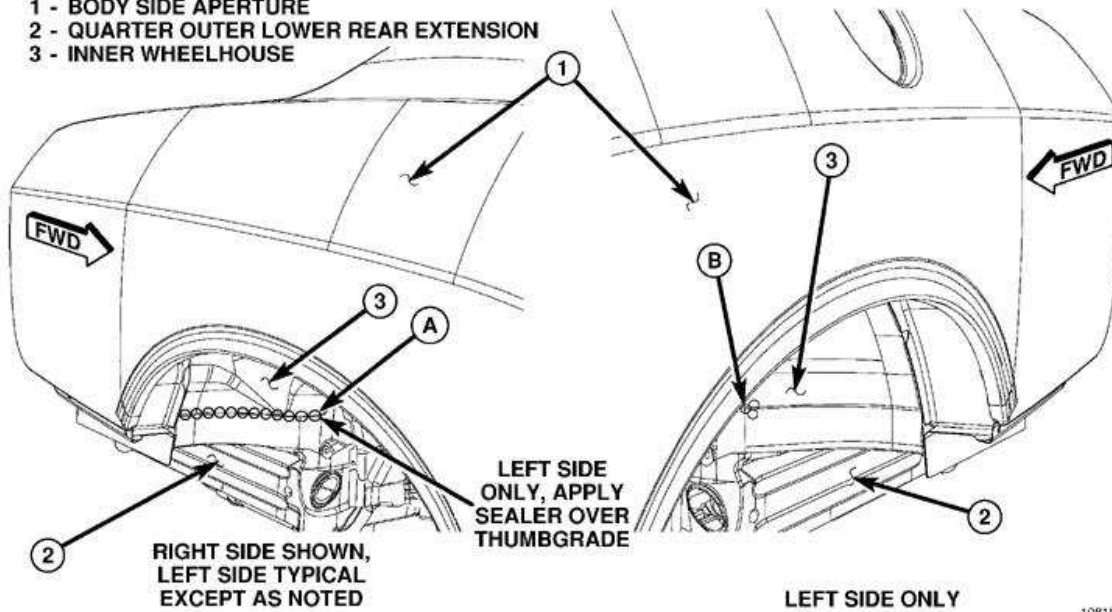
Lower Extension/Lower Wheelhouse Outer
